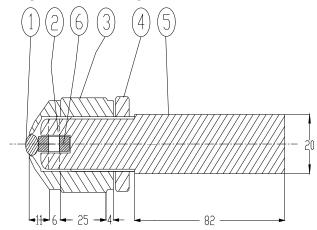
Deep cold rolling tool.1 - Ball, 2 - Hardened pin, 3 - Collet, 4 - Locking nut, 5 - Shank, 6 - Bearing
